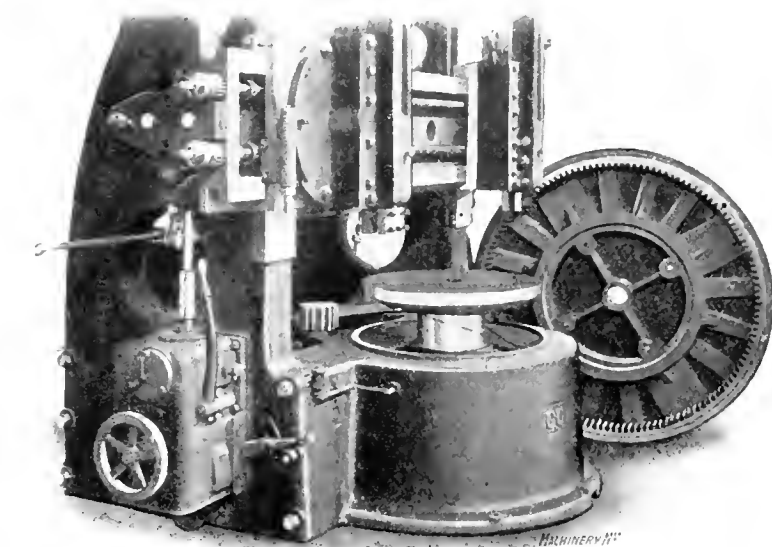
Details, showing Construction of the Spindle Bearing and Internal Gear Drive used on the 60- and 72-inch Mills
